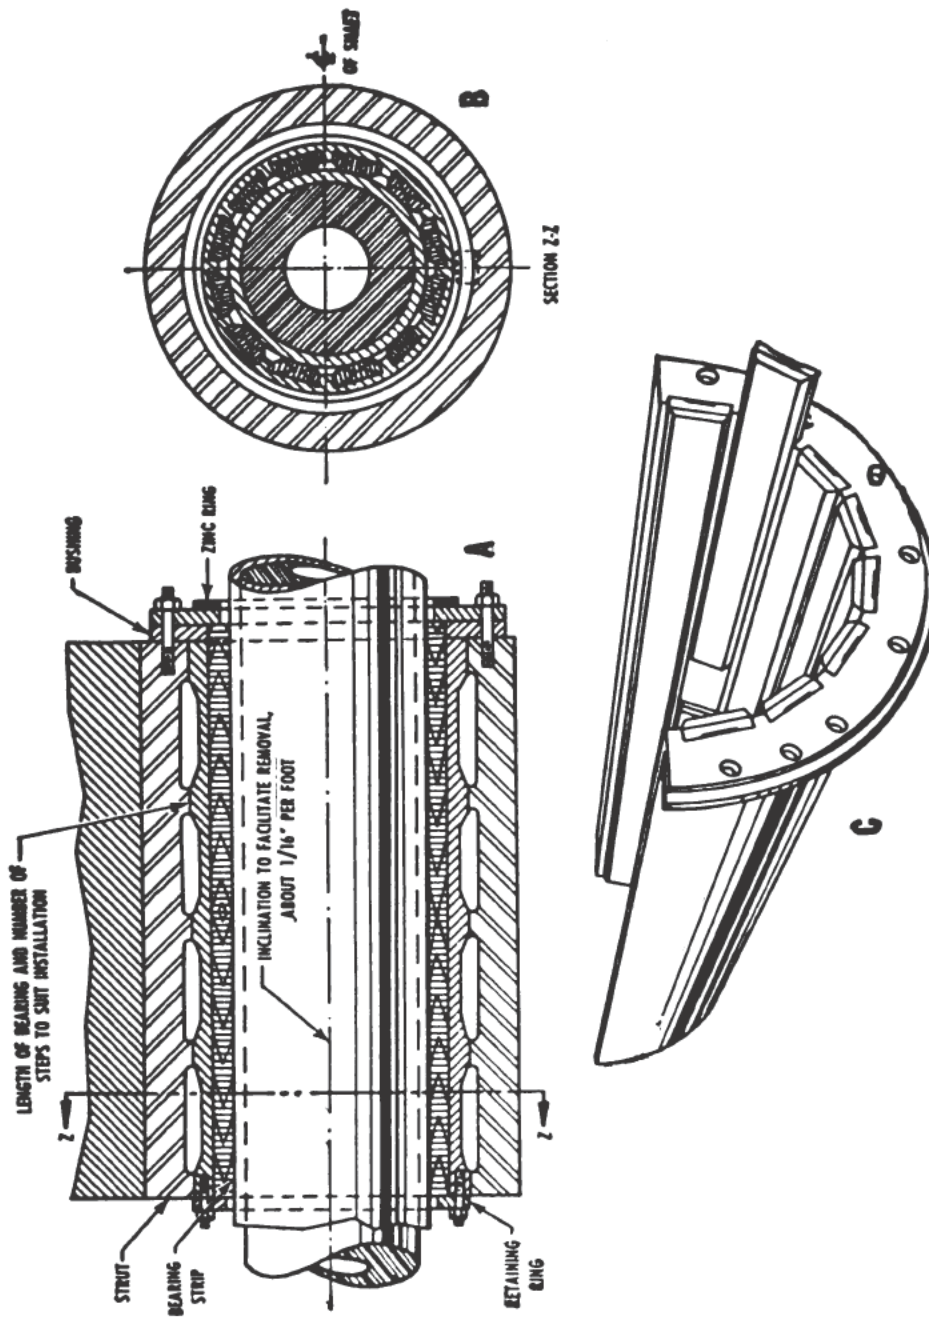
Details of underwater strut bearing. (A) Longitudinal view. (B) Cross-sectional view. (C) Rubber stripping in the bearing bushing.
